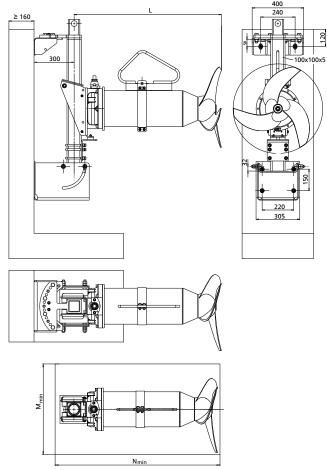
Installation with accessories 22 - Amamix 400 (size 4135 only) / 600
